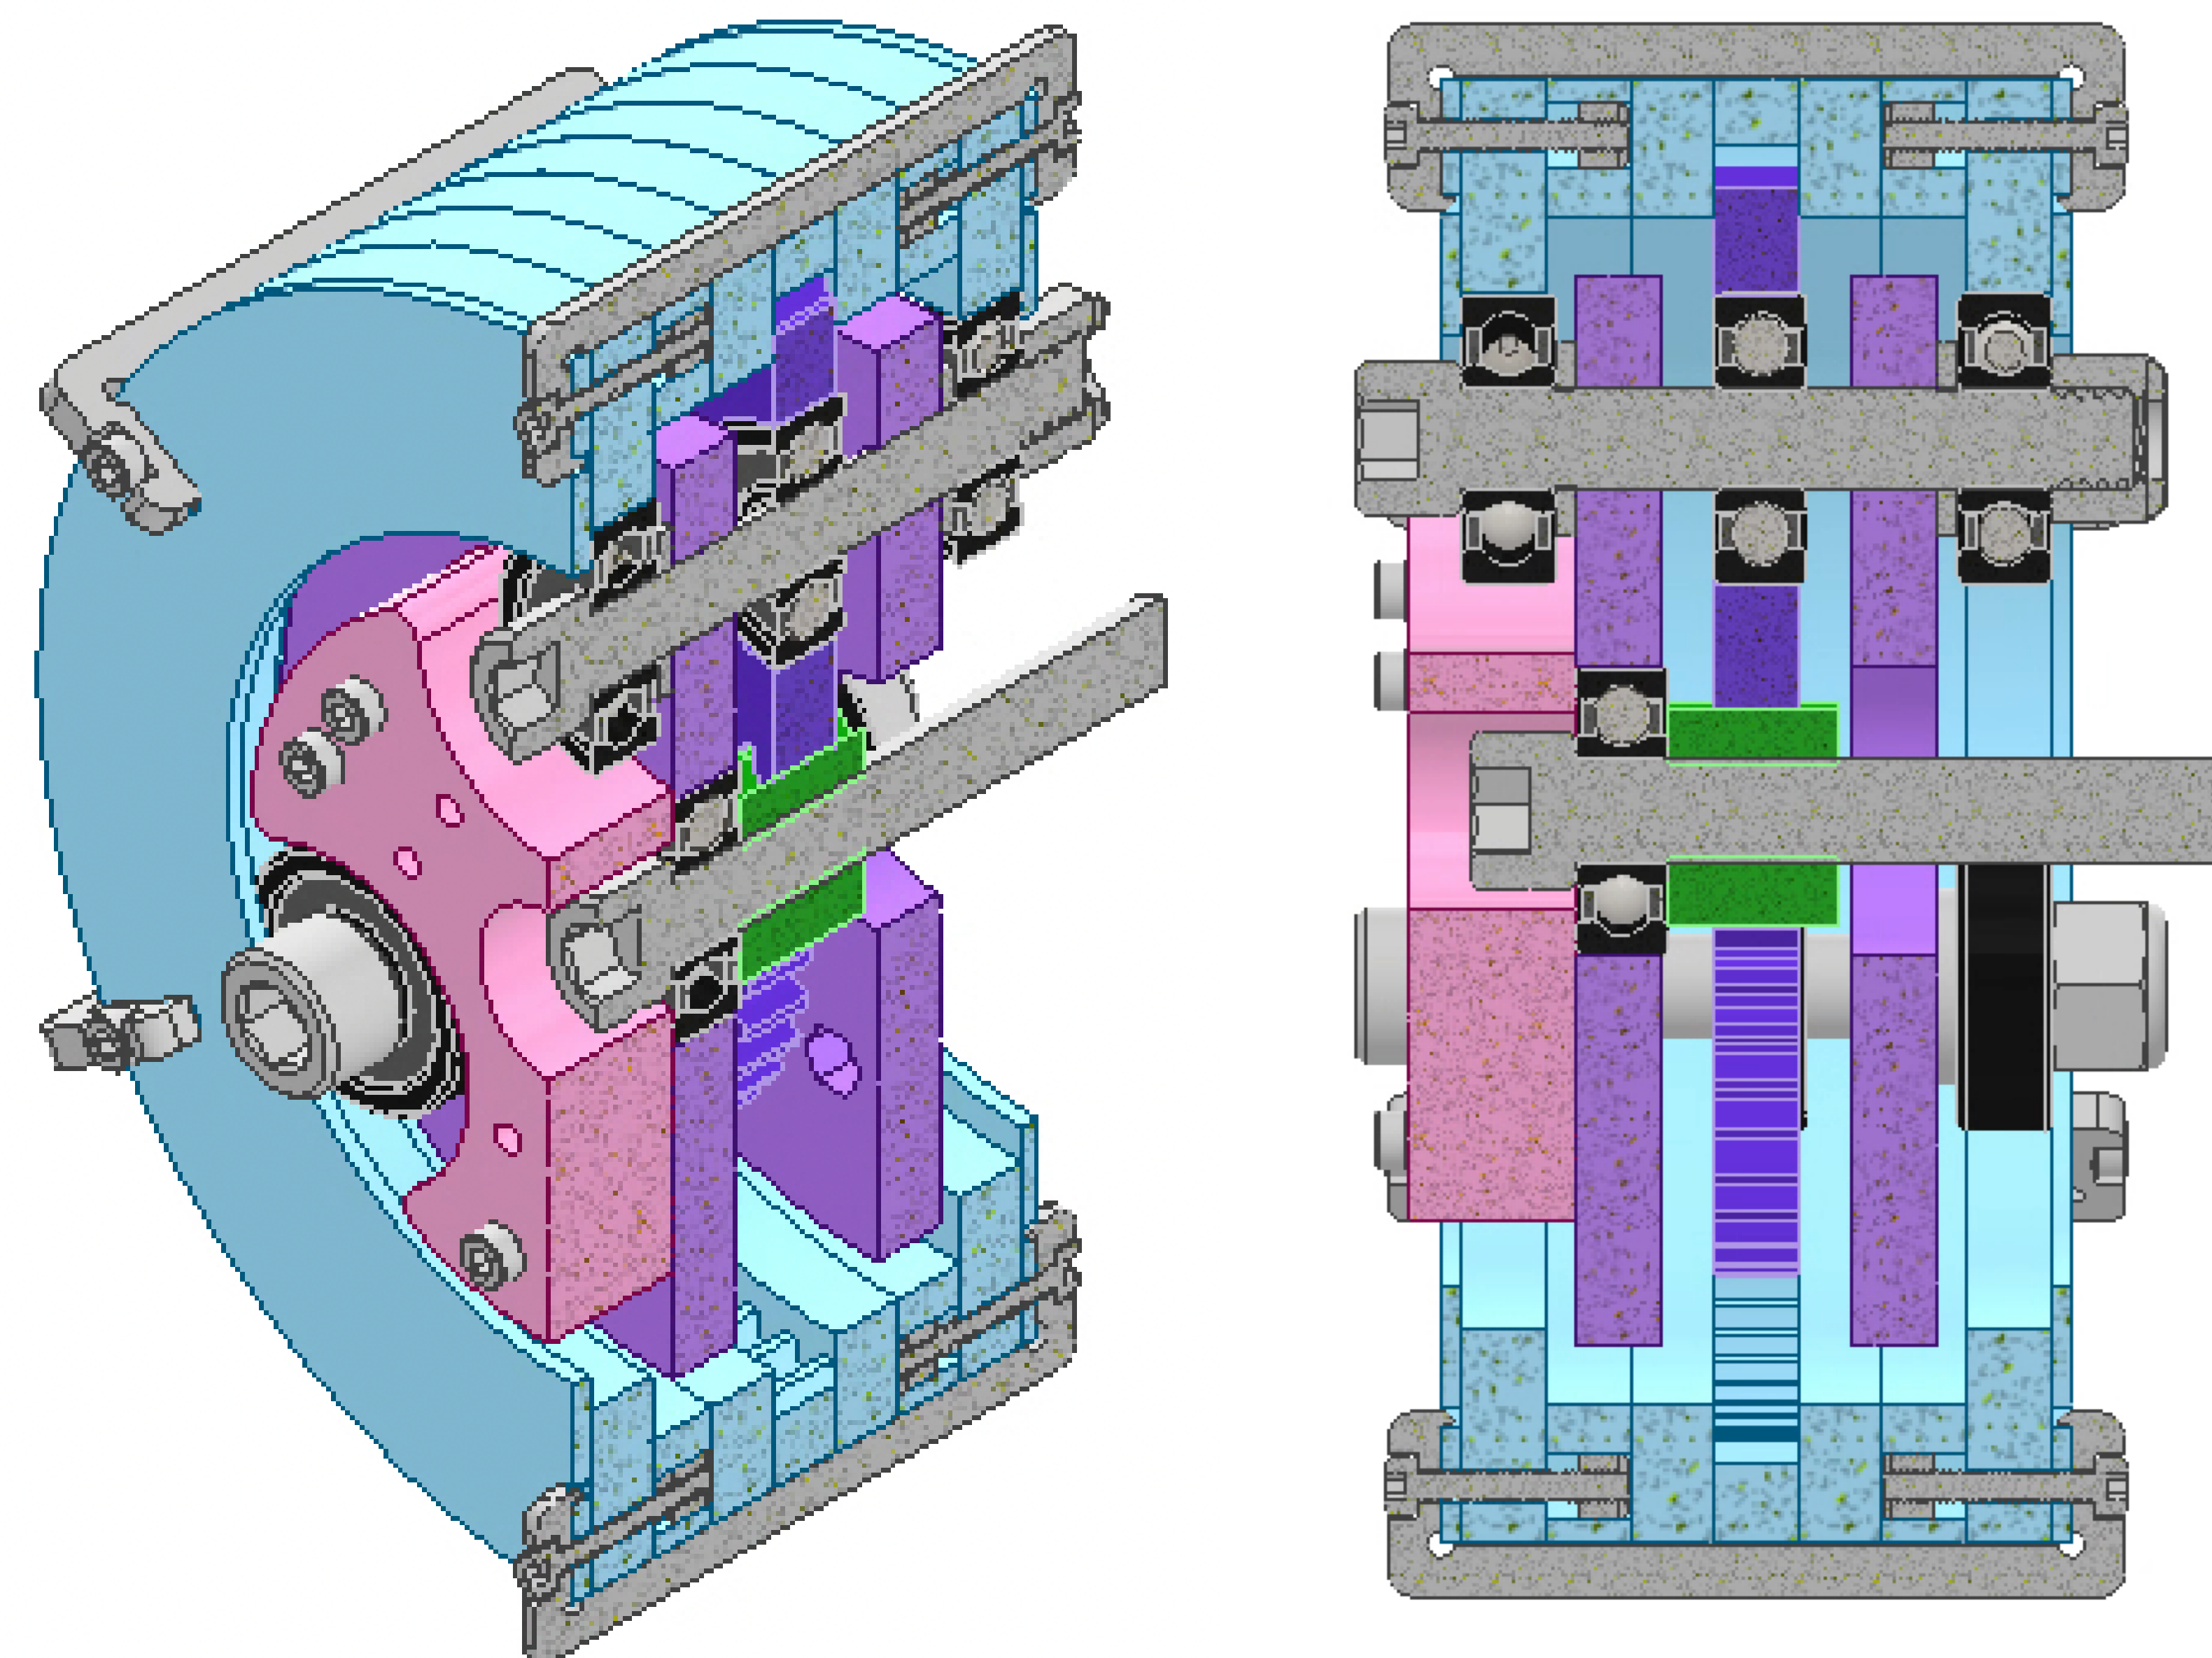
Section views of laser cut gearbox CAD showing the housing (light teal), clamps (gray, outer), sun (green) and planet gears (dark purple), carrier plates (light purple), output assembly (pink), bolts, and bearings.
